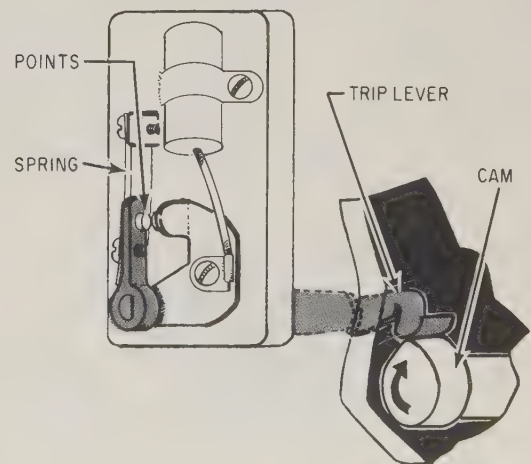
With this arrangement, the cam operates a trip lever which actuates the lever on which one contact is mounted.
